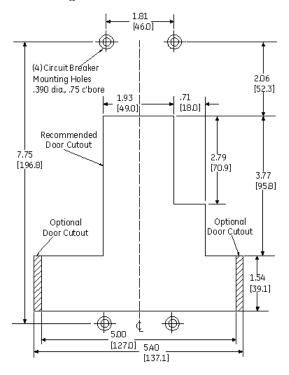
Mounting Hole and Escutcheon Cutout Pattern in/(mm)
